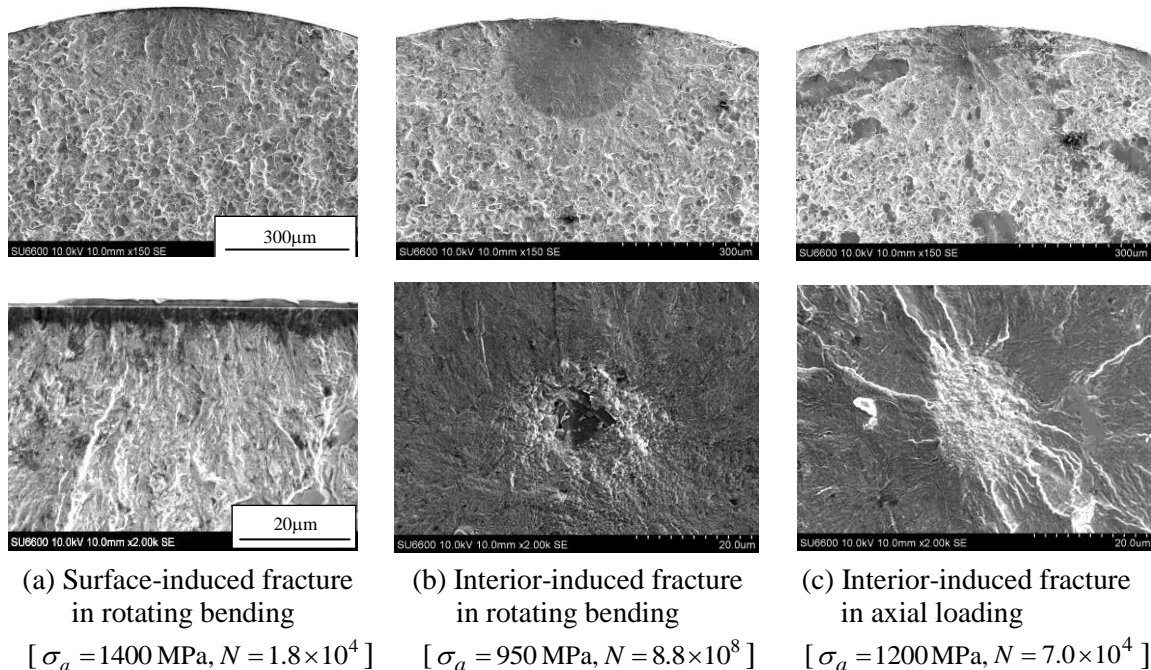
Typical examples of fracture surfaces for SUP7 steel in both loading types
